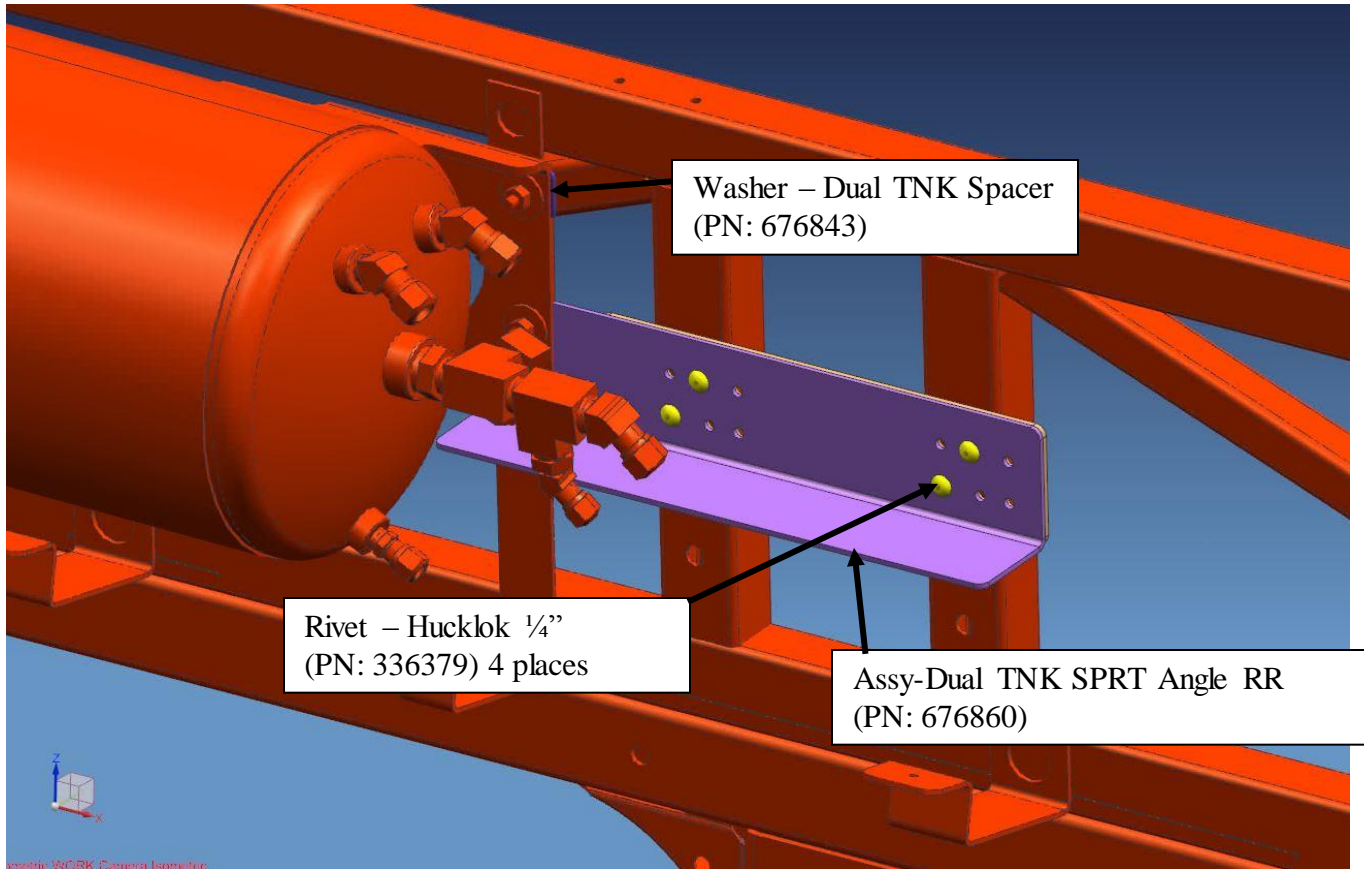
B: VIEW OF DETAIL B (REARWARD BRACKET)
